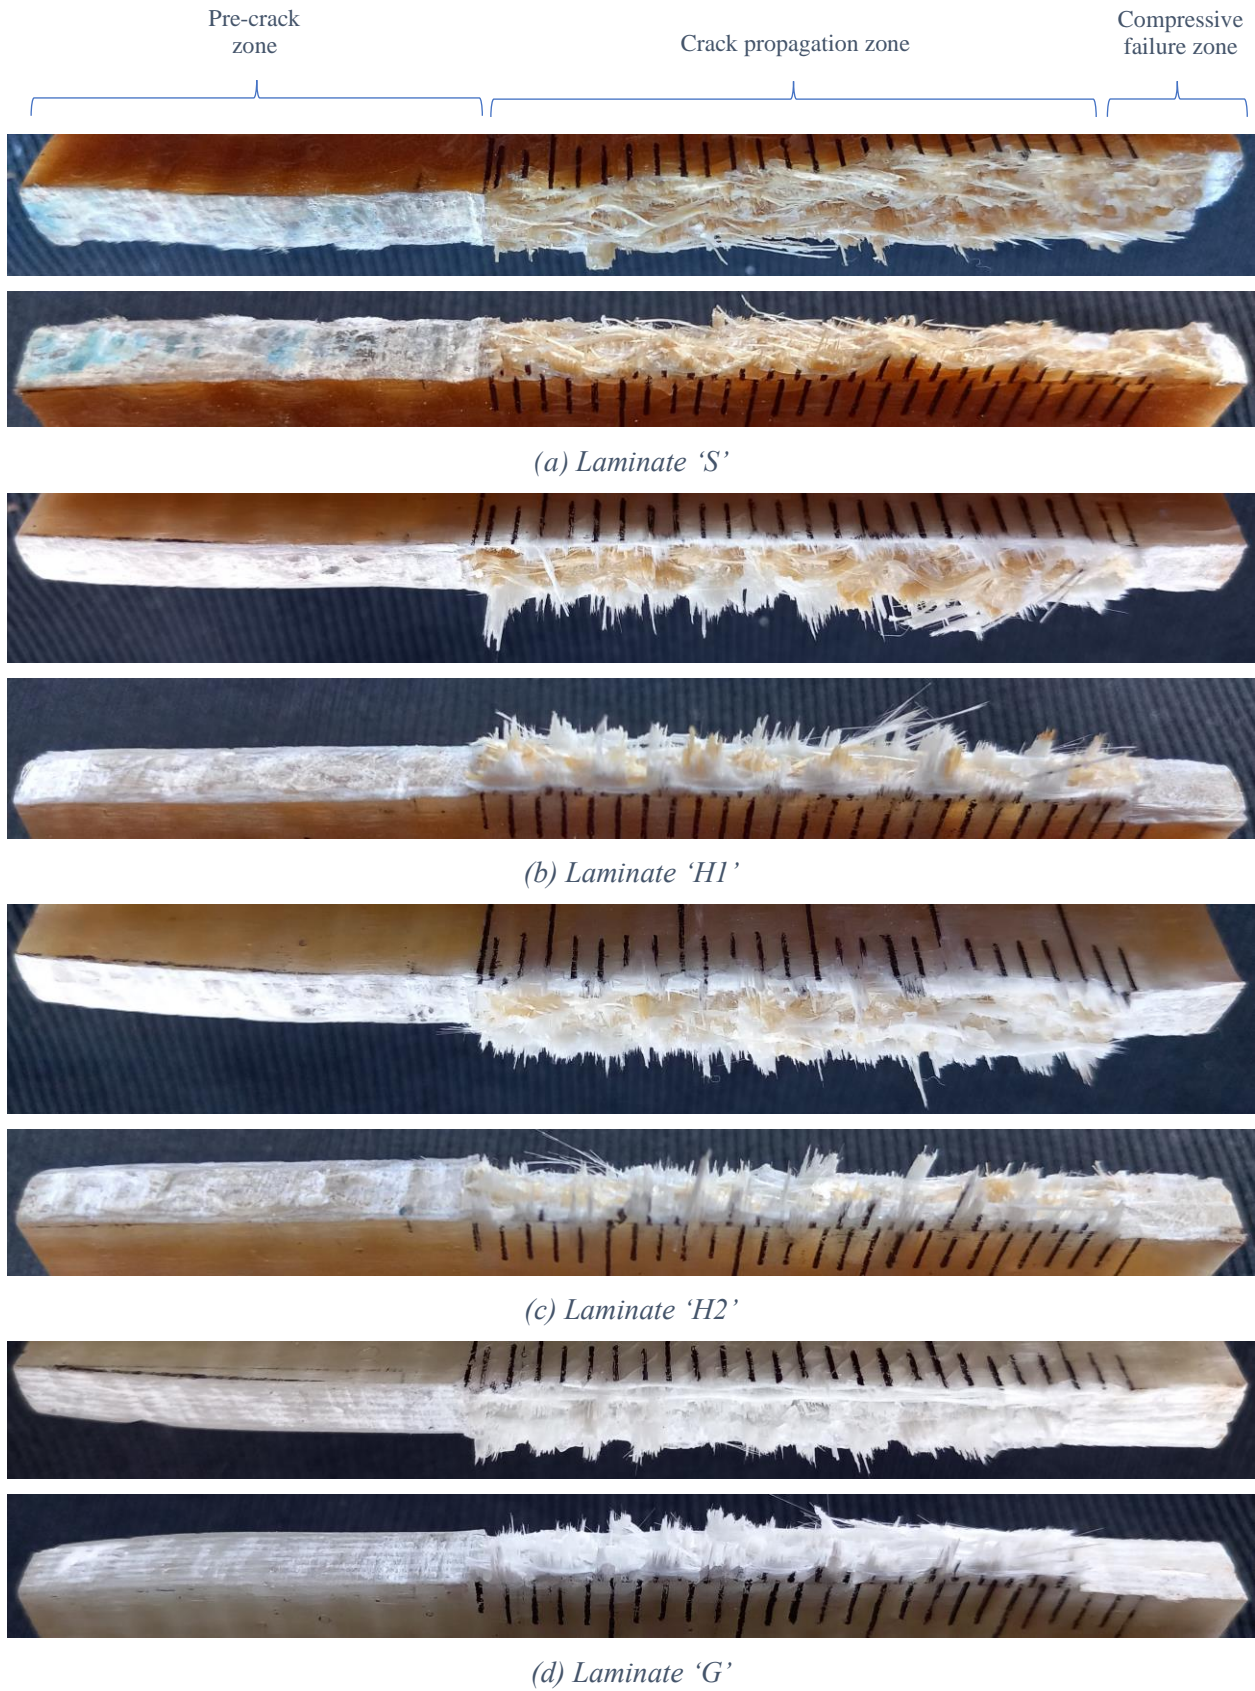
Image of fracture surface (top image: upper surface; bottom image: lower surface)
